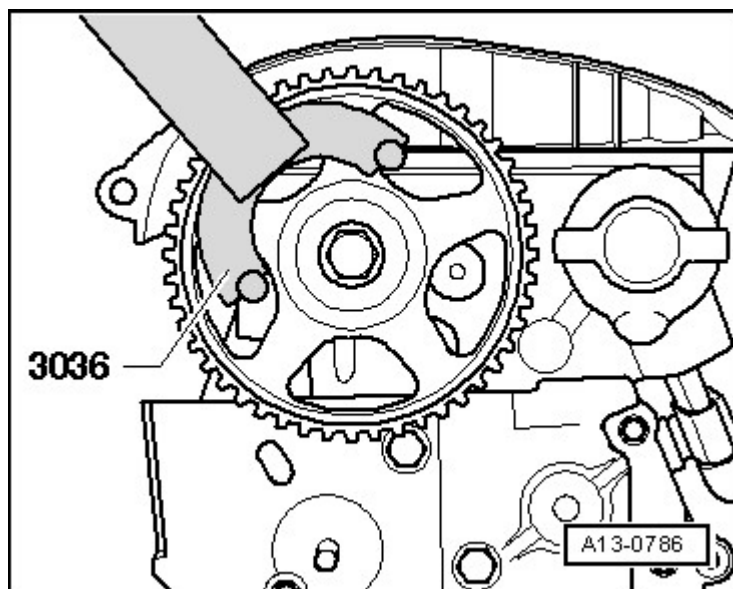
Loosening Bolt For Camshaft Sprocket Using Retainer 3036
